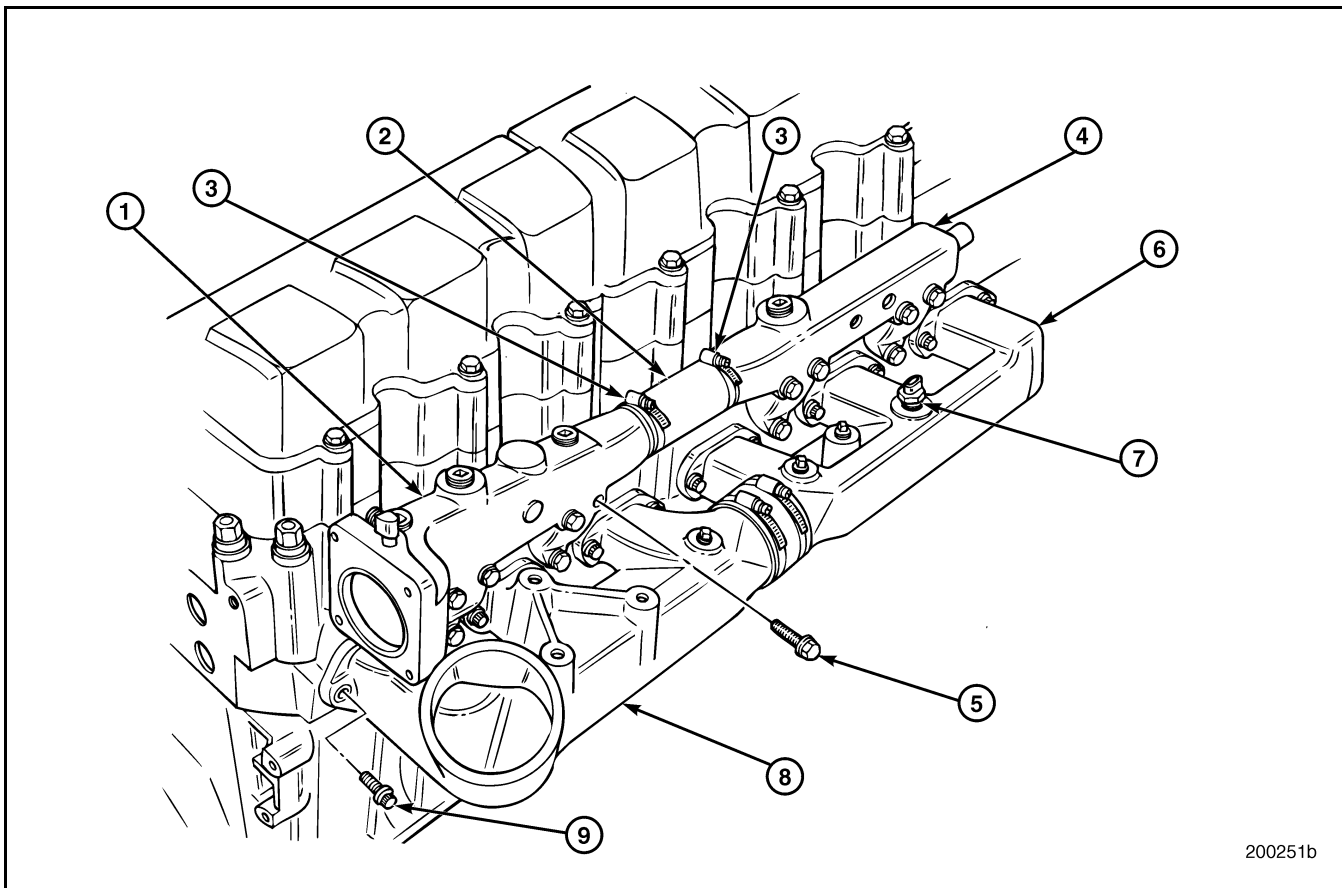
Coolant Manifold and Air Inlet Manifold Installation (Shown with Two-Piece Air Inlet Manifold)
